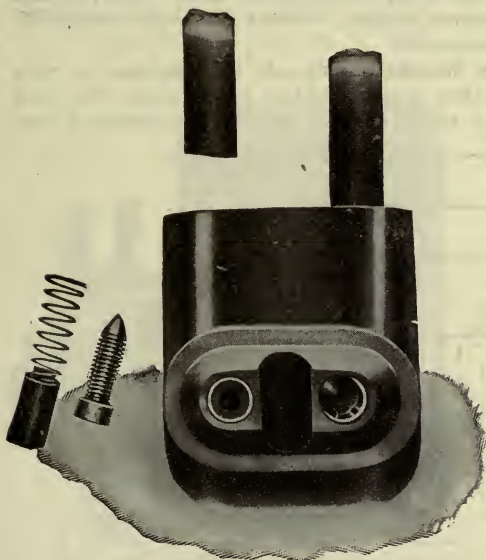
View of Double Brush Holder. NU4 Magneto.
